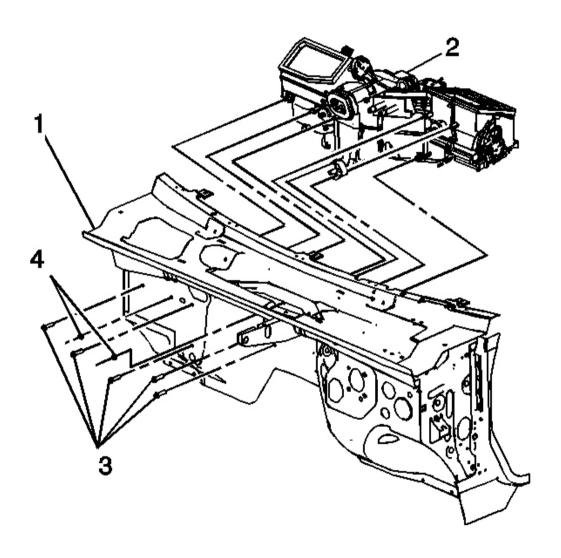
HVAC Module Assembly Courtesy of GENERAL MOTORS CORP.
